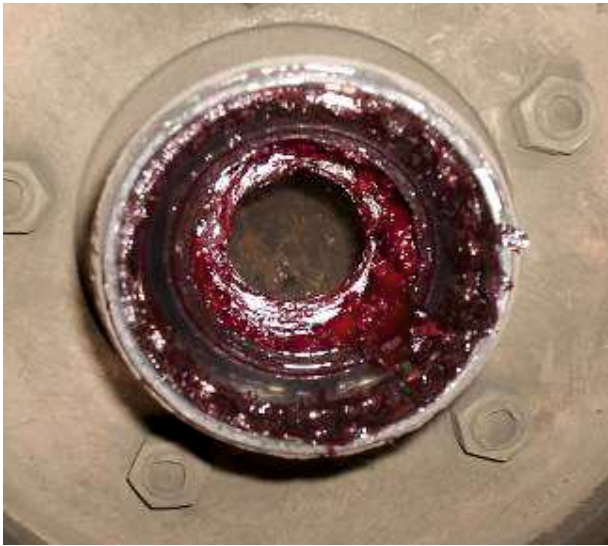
Front Left Hand Side Wheel Bearings & Wheel Hub of Vehicle – 1.
